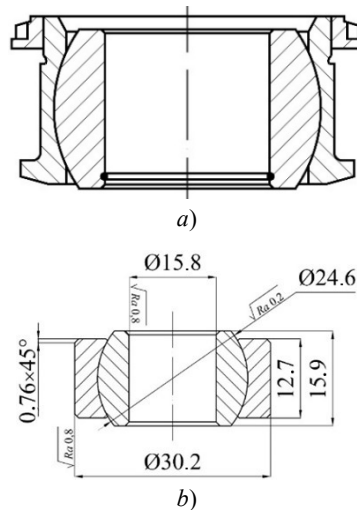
The design of spherical hinge assemblies: *a* — outer cage with flange; *b* — outer cage without flange [1]
